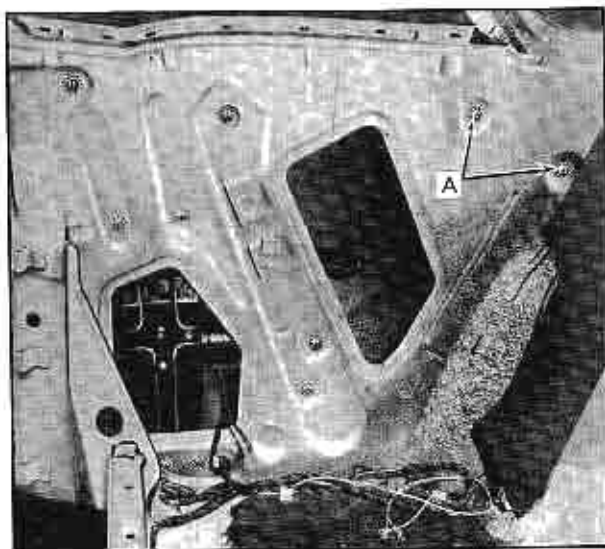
Rear Quarter Window Assembly (6237X)
